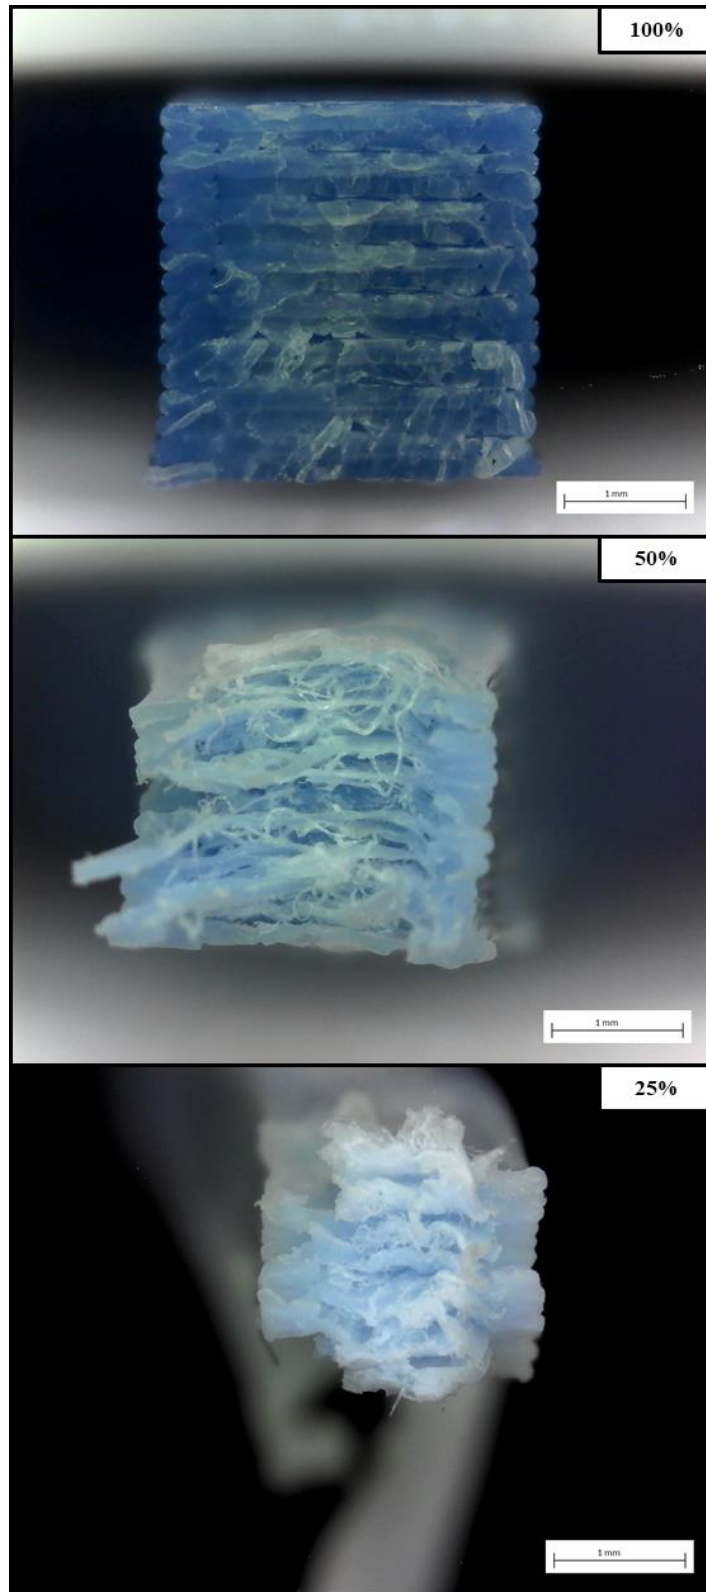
Representative fracture surfaces of tensile specimen with compositions 100%, 50%, and 25%. Necking on composition 50% is visible.
